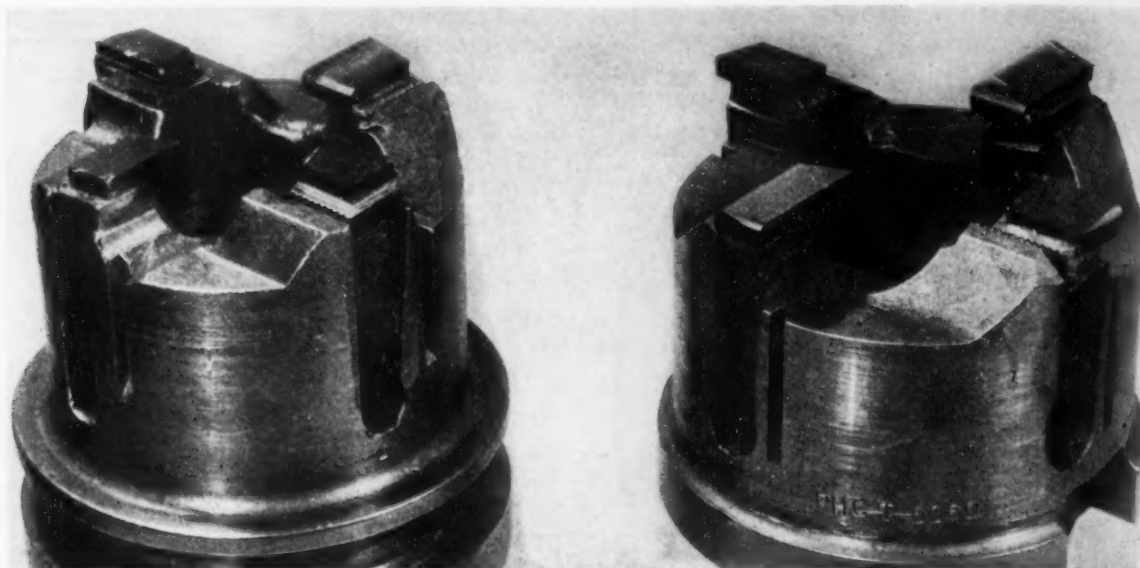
The cutter, left, is ready for resharpener after machining 92 planet posts. Compare this with duplicate
